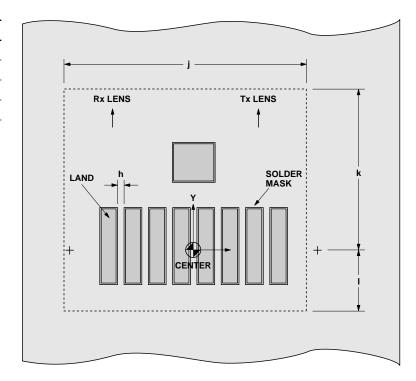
PCBA – Adjacent land keep-out and solder mask.
